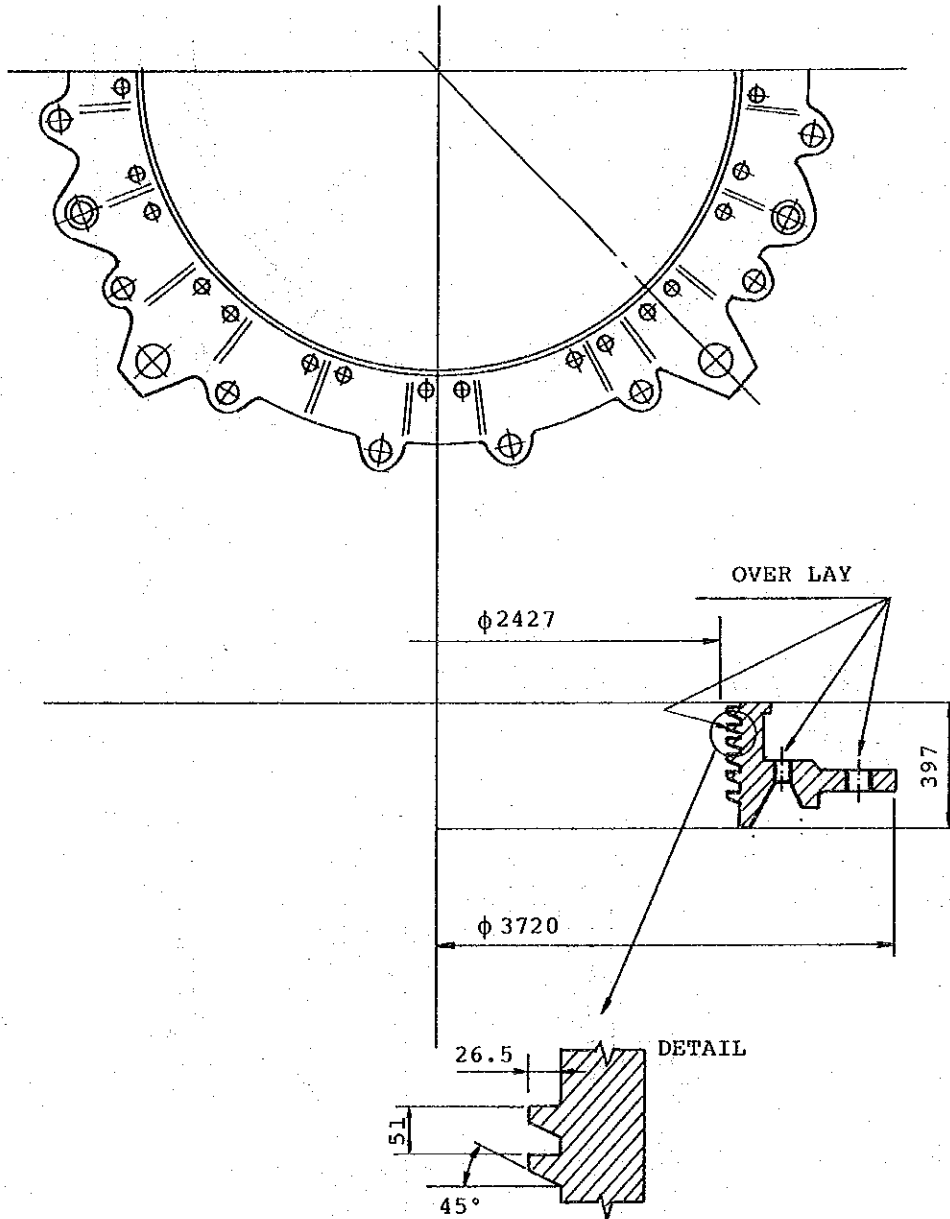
(3/5) Representative part requiring overlay welding
